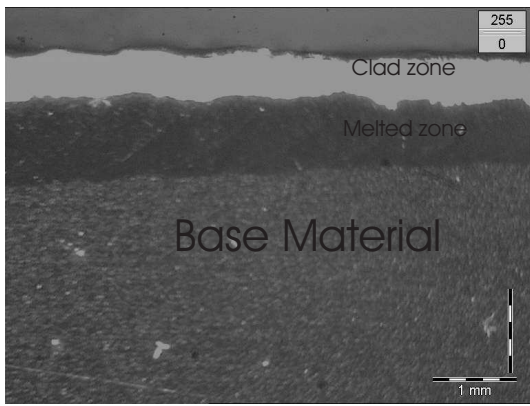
stereomicrograph of No. 5 showing clad zone and melted zone which gets tapered shown at the left side
